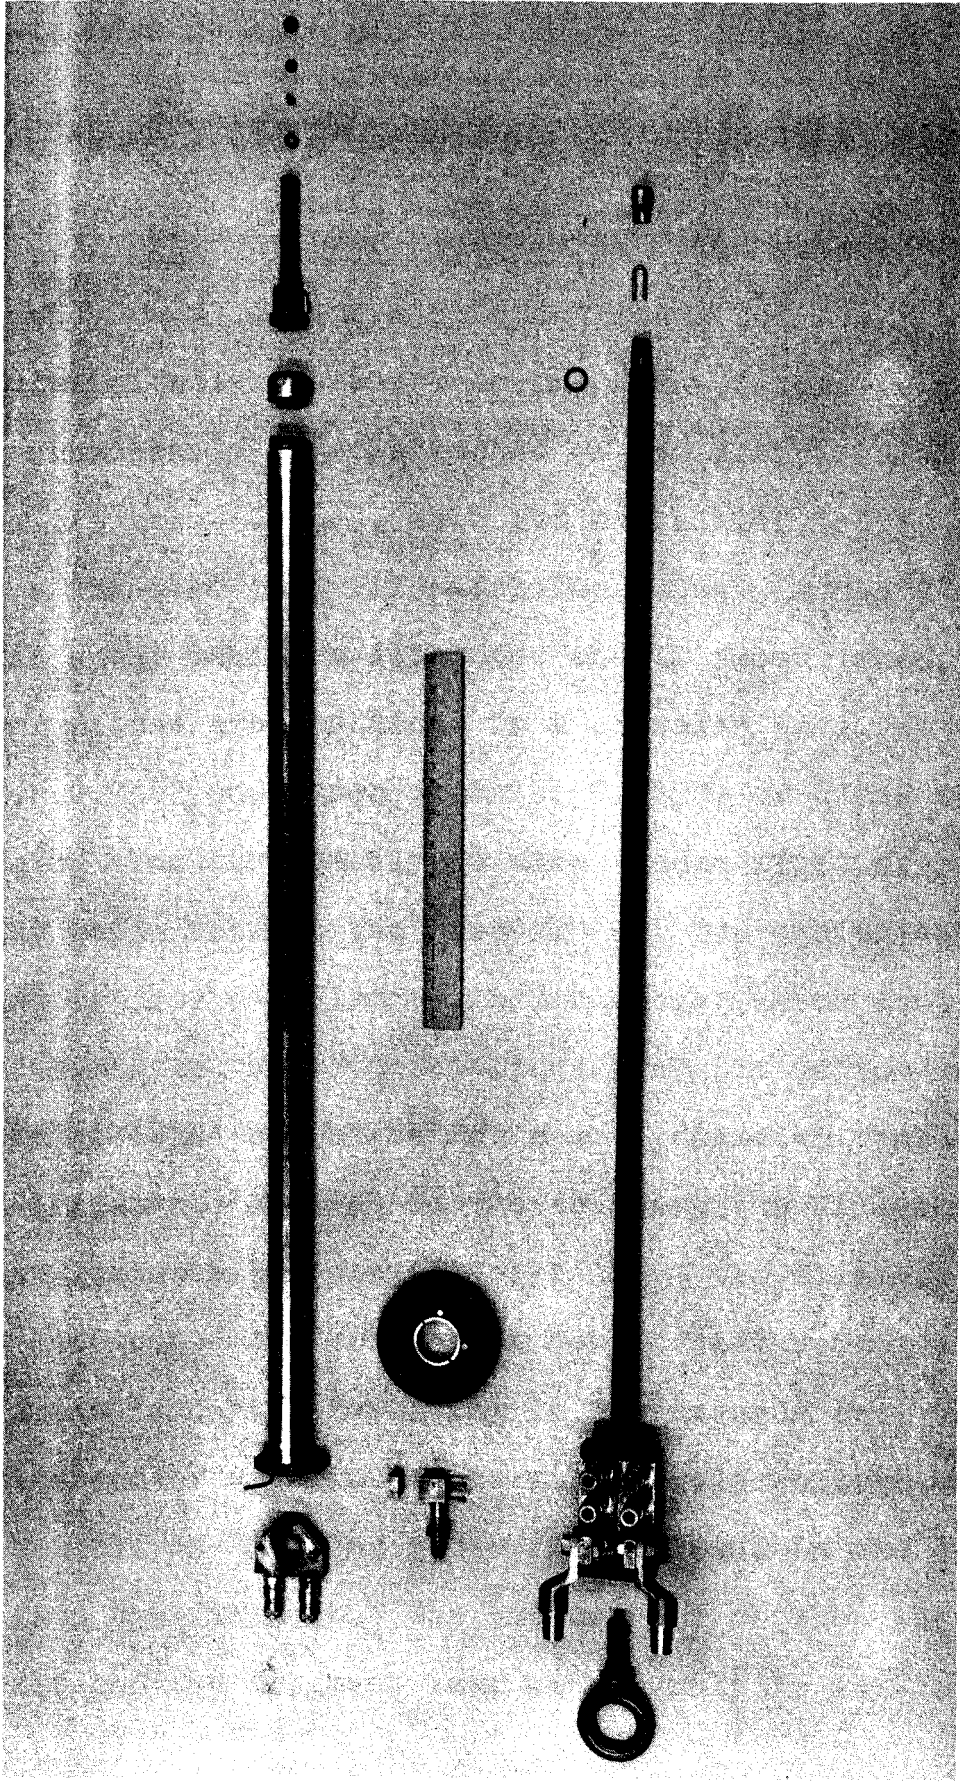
Picture of disassembled ion source. Top (left to right): outer jacket, chimney housing, chimney and reflector button assembly. Bottom (left to right): filament lead subassembly, filament and filament heat shield.
